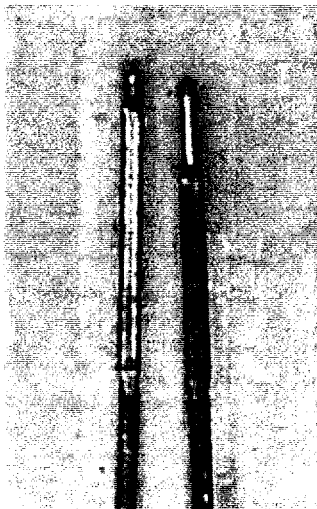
Photograph of source capsules 14 & 15 (impact tested near weld area of capsule) Note: Some flattening of capsules but no breakage.
